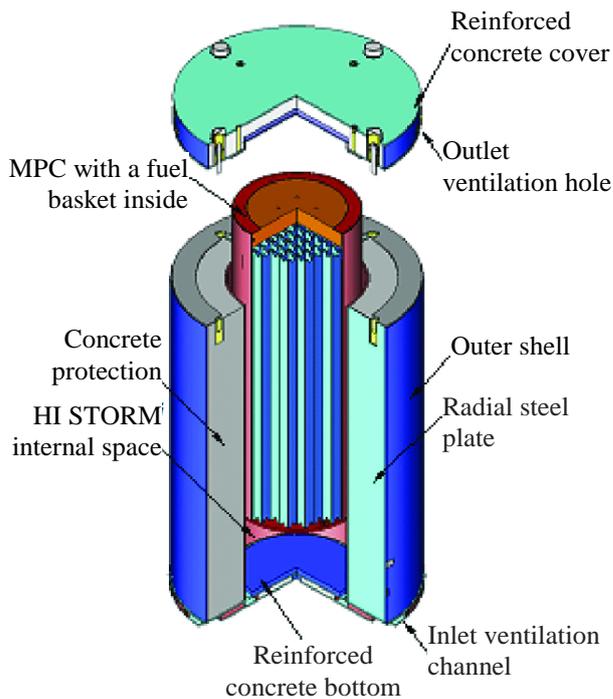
Graphic representation of a HI-STORM 100 container with a multipurpose container inside
